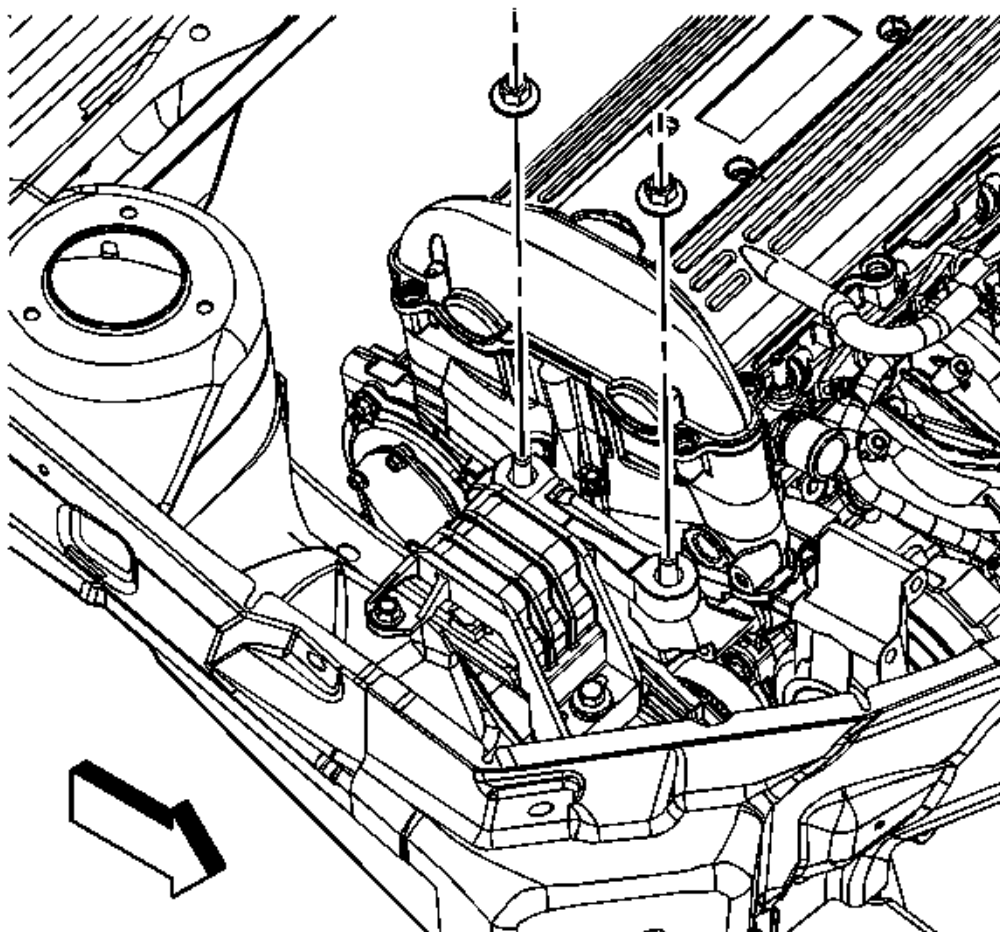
Identifying Engine Mount & Engine Mount Bracket Nuts
